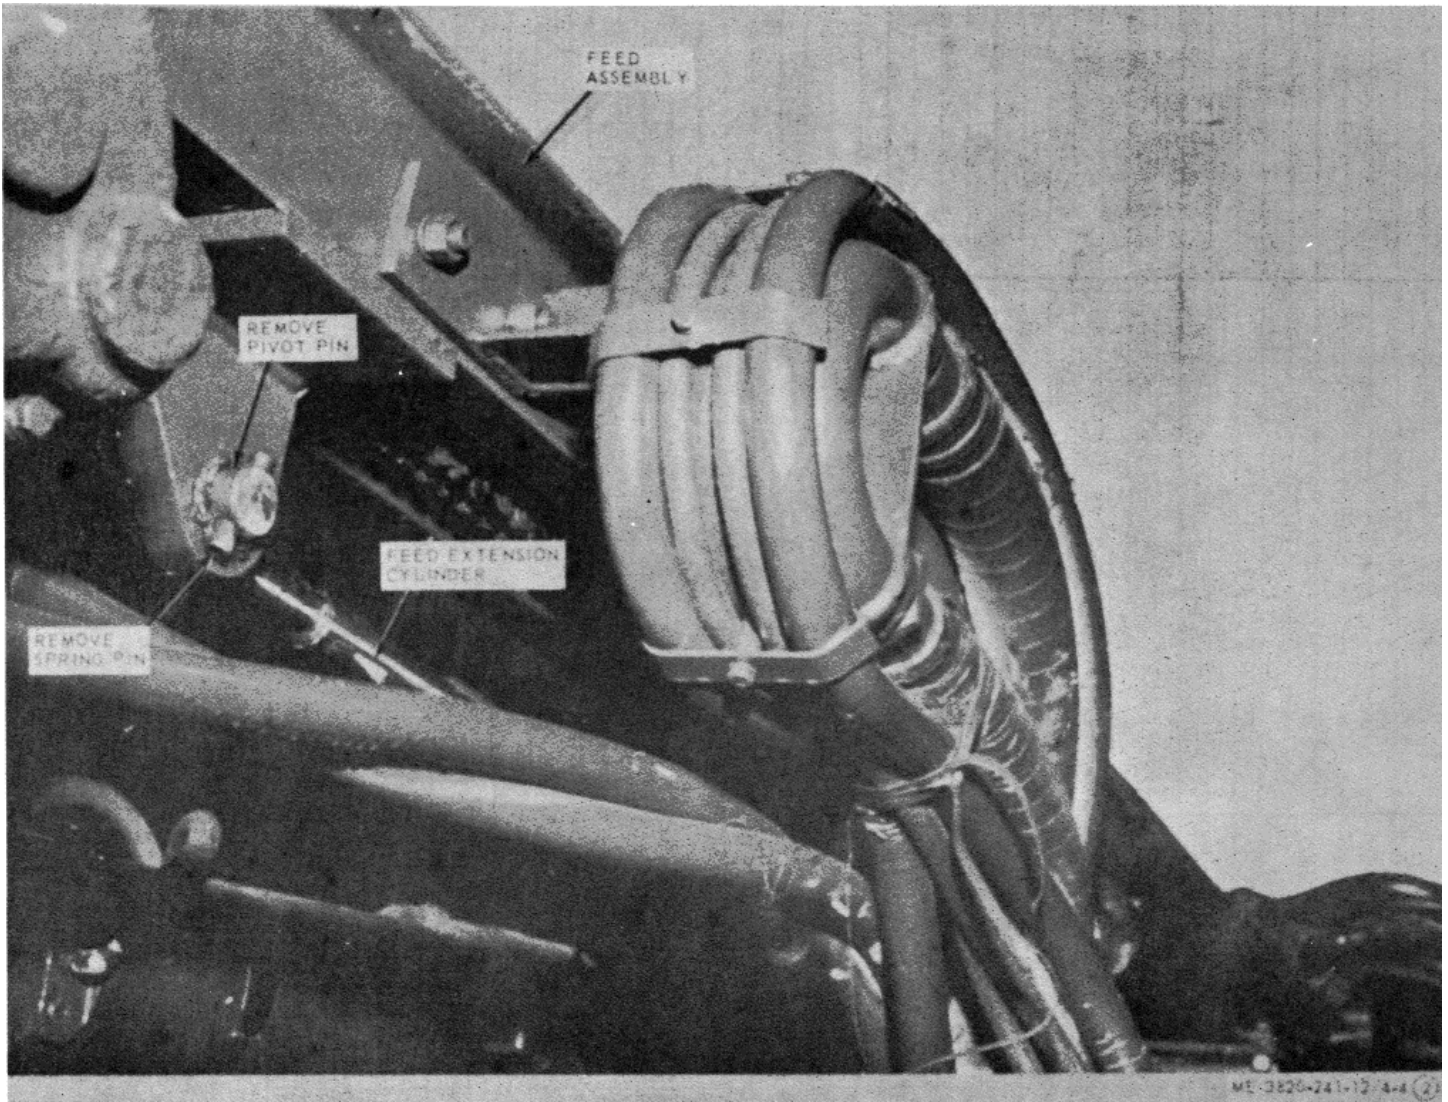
Rock drill feed assembly, removal and installation (sheet 2 of 2).
